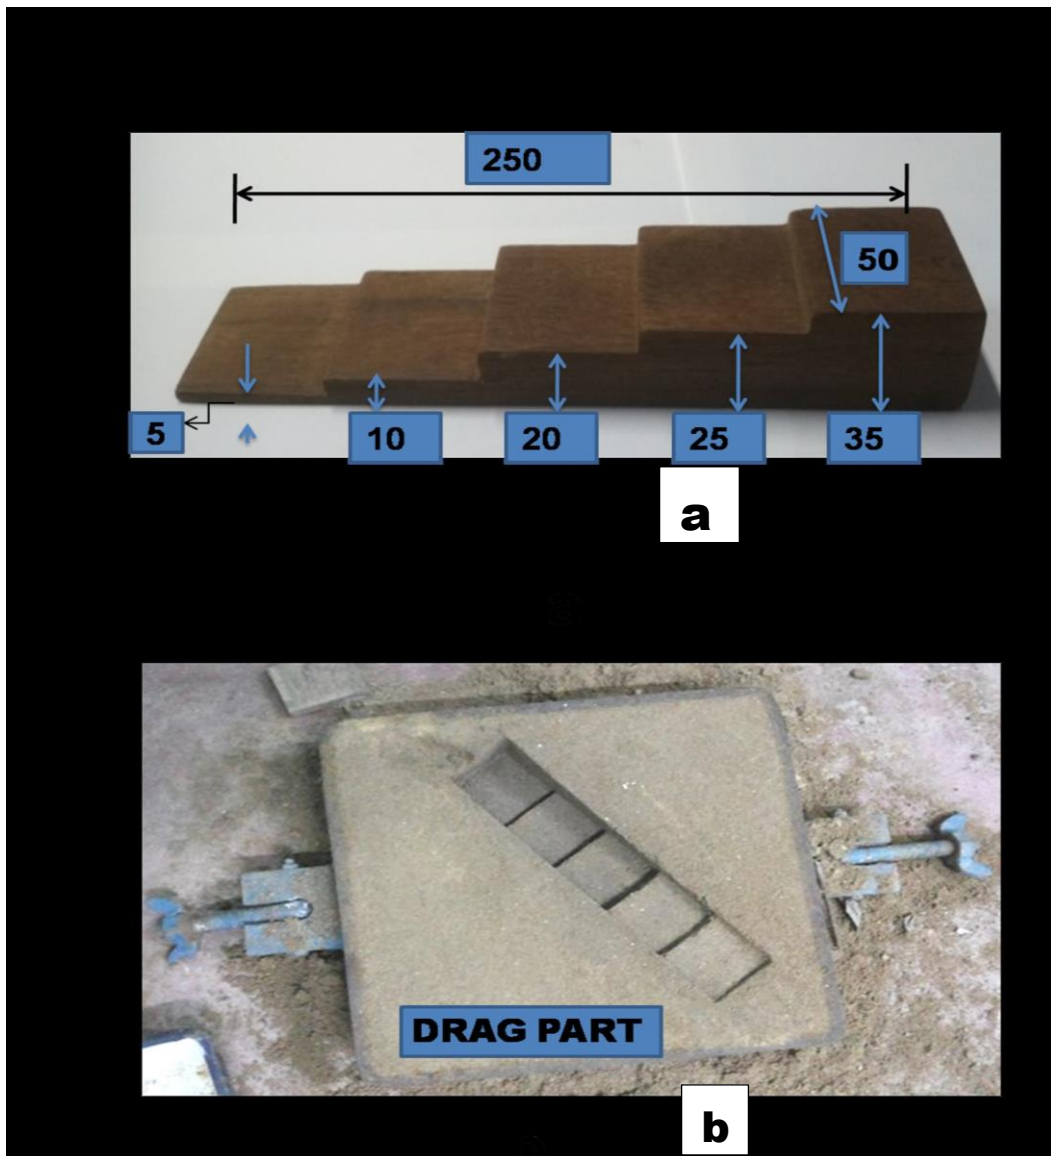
Sand casting step shape (a) pattern with dimension (mm) (b) green sand mold
